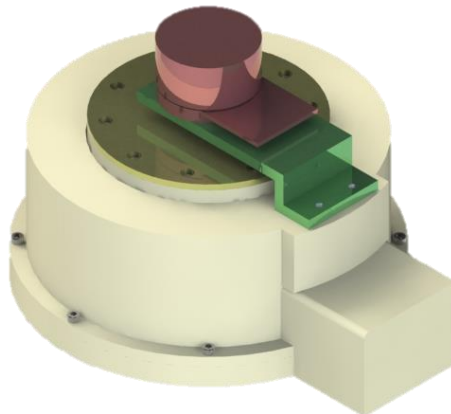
1. 7: Fixture for accuracy and pointing test, mounted with motor.
